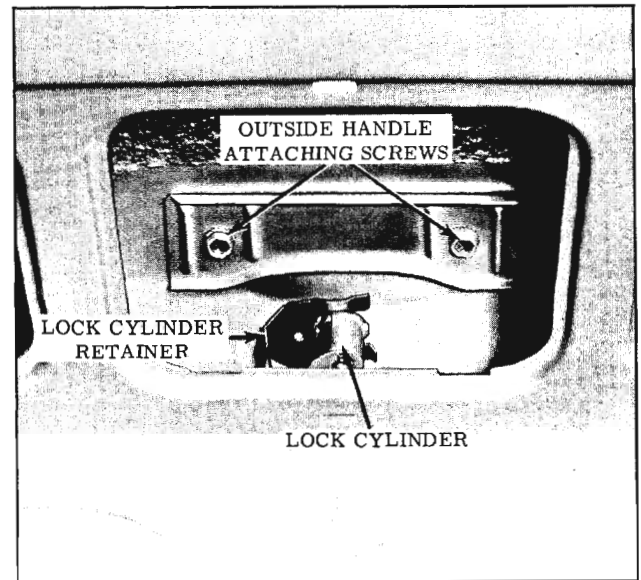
Back Door Outside Handle &amp; Lock Cylinder
